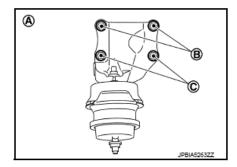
Identifying Engine Mounting Brackets Bolts With Tightening Sequence Courtesy of NISSAN NORTH AMERICA, INC.
